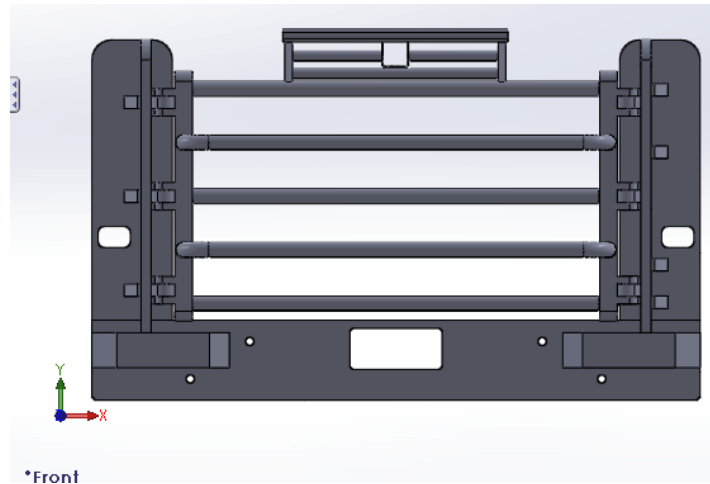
Crab Door design with z-axis plates and rear camera mounting bracket
